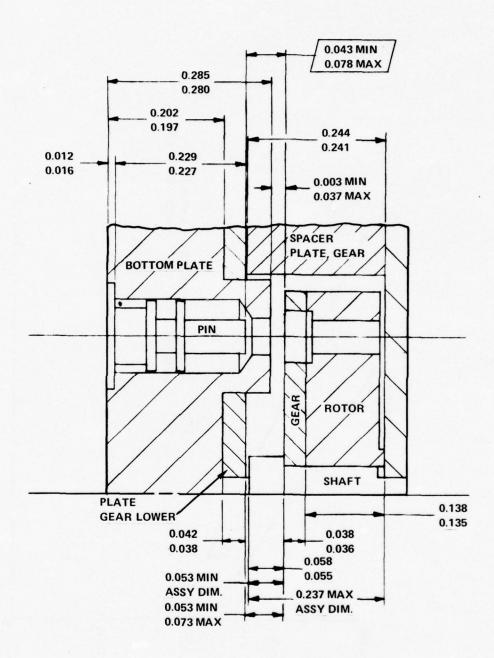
Set-Back Pin Travel Before Engaging Rotor.
